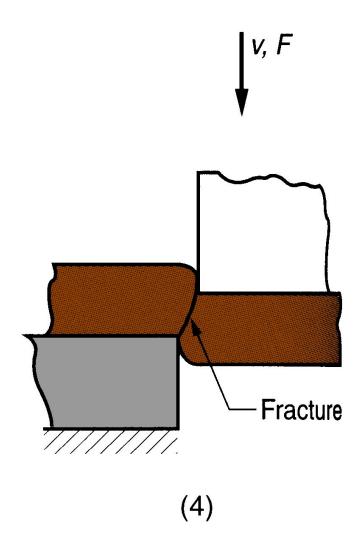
Shearing of sheet metal between two cutting edges:
